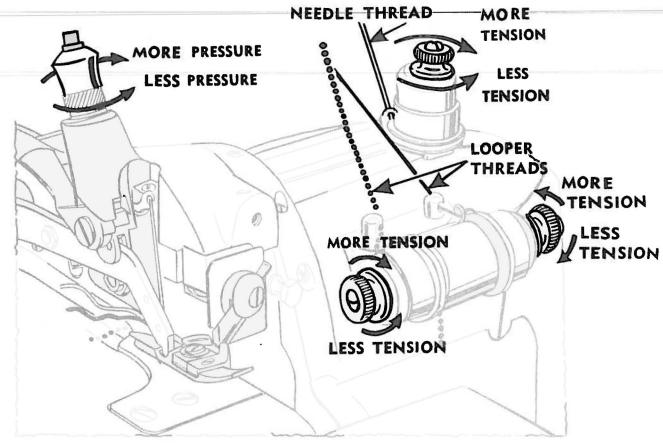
Regulating Tension of Threads and Pressure of Presser Foot on Material
